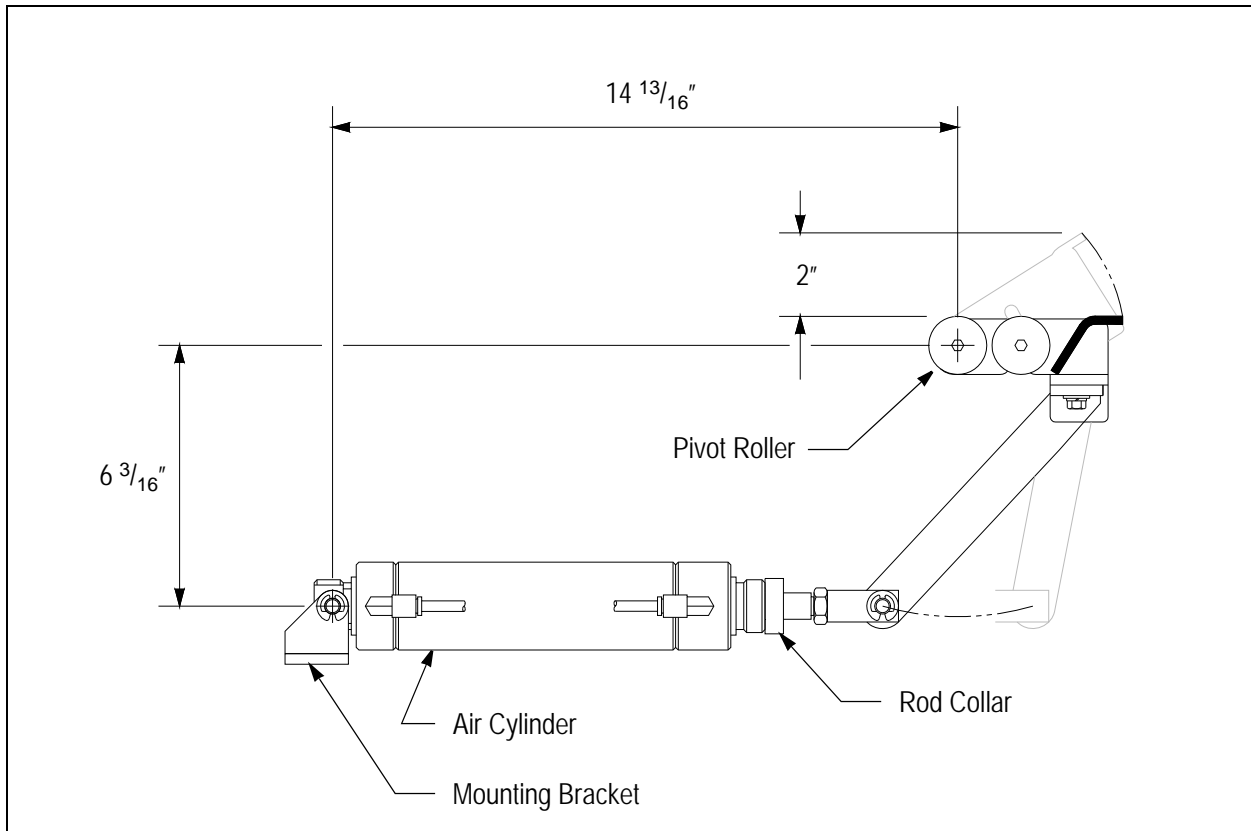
Actuator & Linkage Dimensions – 1 1/2" & 3" Roller Centers
